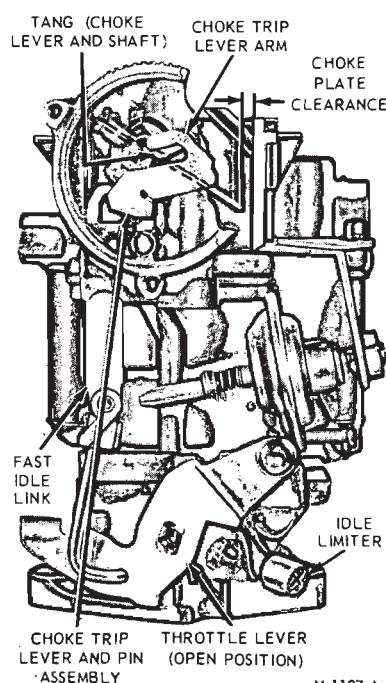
Dechoke Clearance Adjustment—Carter Model YF 1-V
